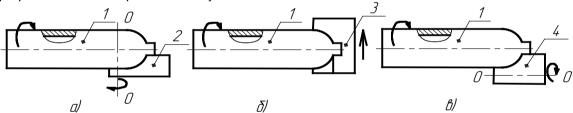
Scheme of rolling of tubular blanks:1 - blank; 2 - 4 - tools.
